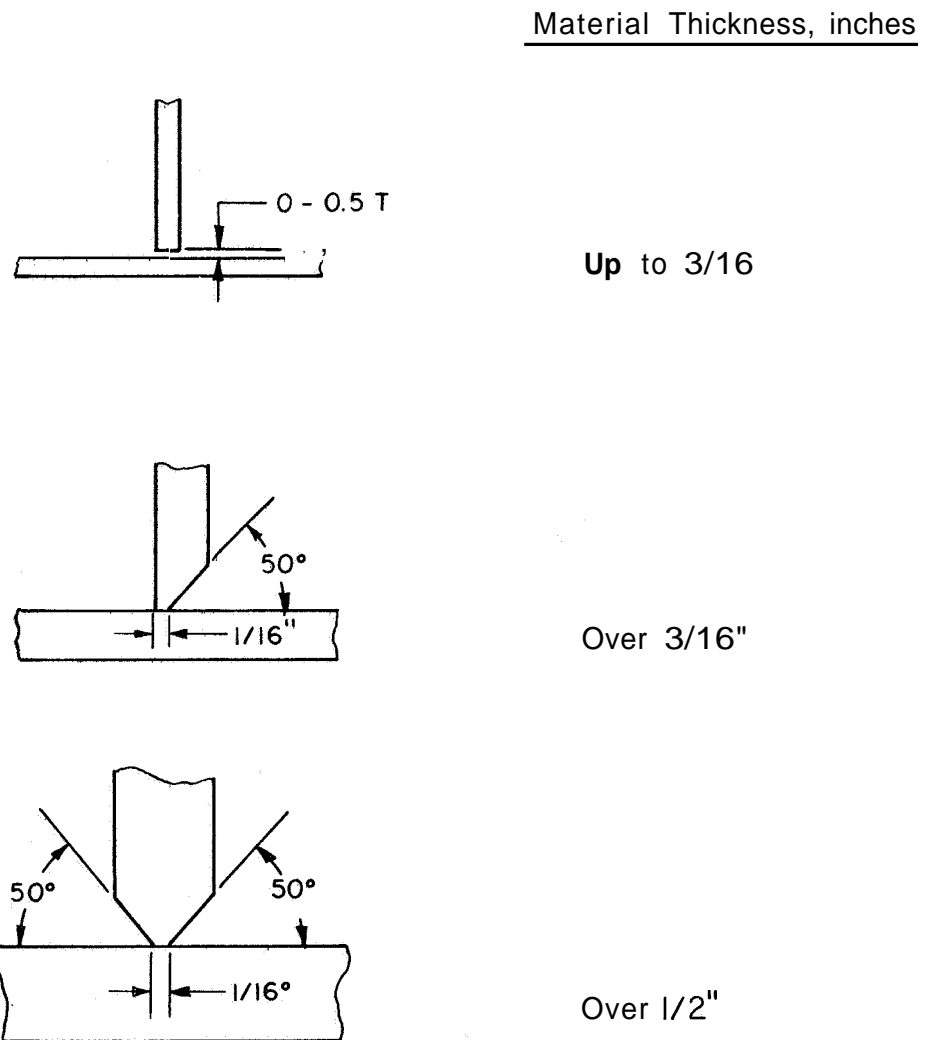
TYPICAL FILLET JOINTS FOR GTA WELDING STAINLESS STEEL (REF. 31)
